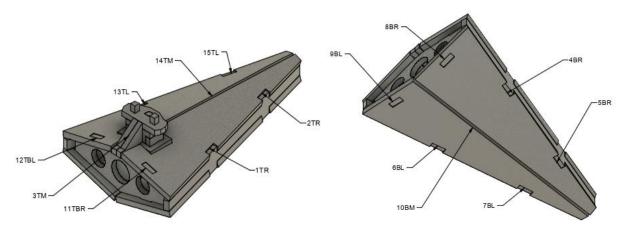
Isometric views of Aircraft design with welding codes
